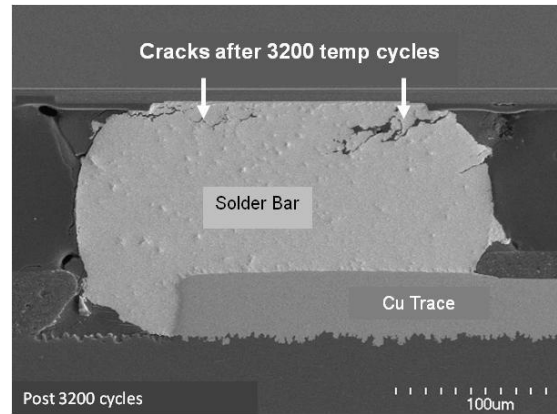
Cross section x-ray of an eGaN FET solder bump showing bump cracking.
